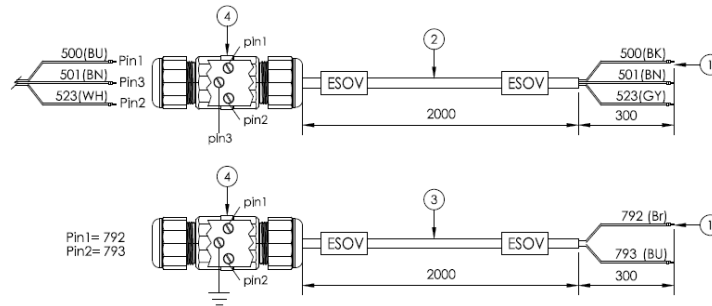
Cable adapters for condenser shut off valve actuator and limit switches
